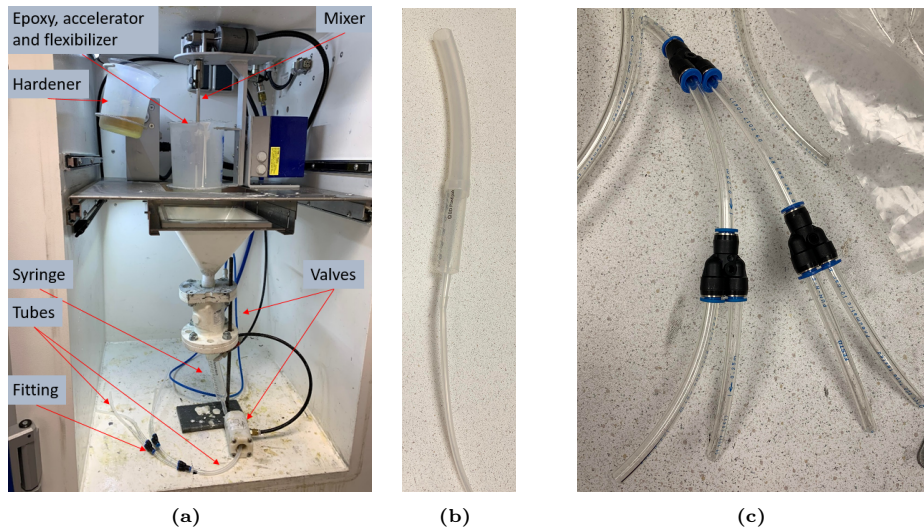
Components in the vacuum casting chamber: (a) Vacuum casting chamber with explanations ; (b) Tube of silicon connected to a syringe which is attached to the funnel, in addition to a tube of silicon (6 mm) connected to the other end of the syringe; (c) Tubes of glass (6 mm) and fittings make it possible to separate the fluid flow into four cups.
